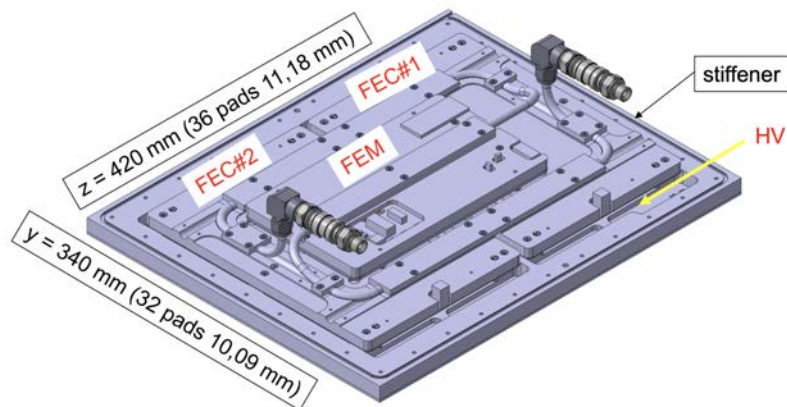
3D drawing of a single ERAM module ready for installation in the module frame. The module includes the resistive Micromegas PCB glued onto its aluminum stiffener, all the electronic boards and cooling pipes.
